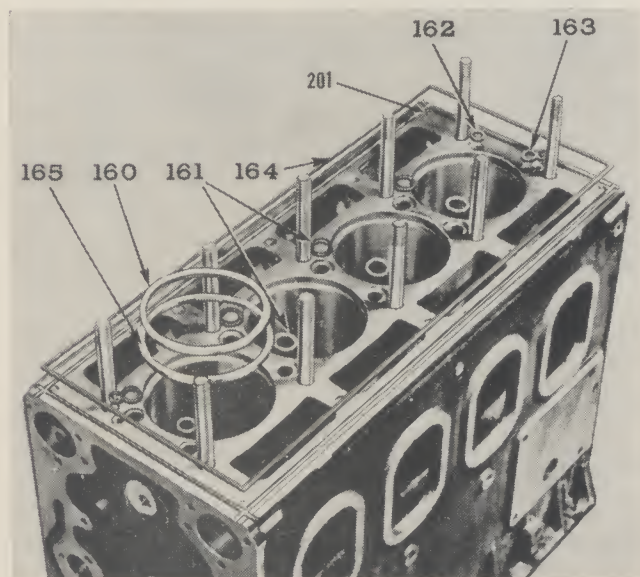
D—GM engine. Location of cylinder head gaskets, oil and water seals for a high block design engine. Cylinder liner inserts (165) are installed under the liner flange.
